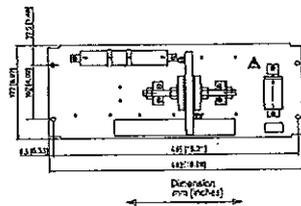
Dimension drawing of a one phase high impedance resistor unit
